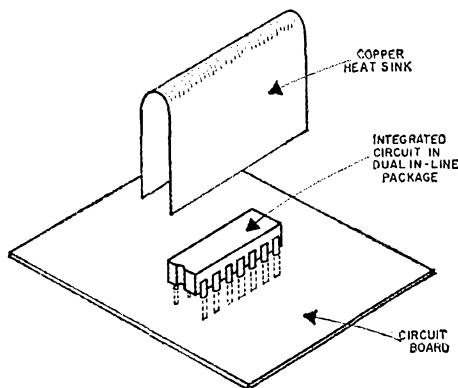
Heat sink for integrated circuits that come in dual in-line packages.
